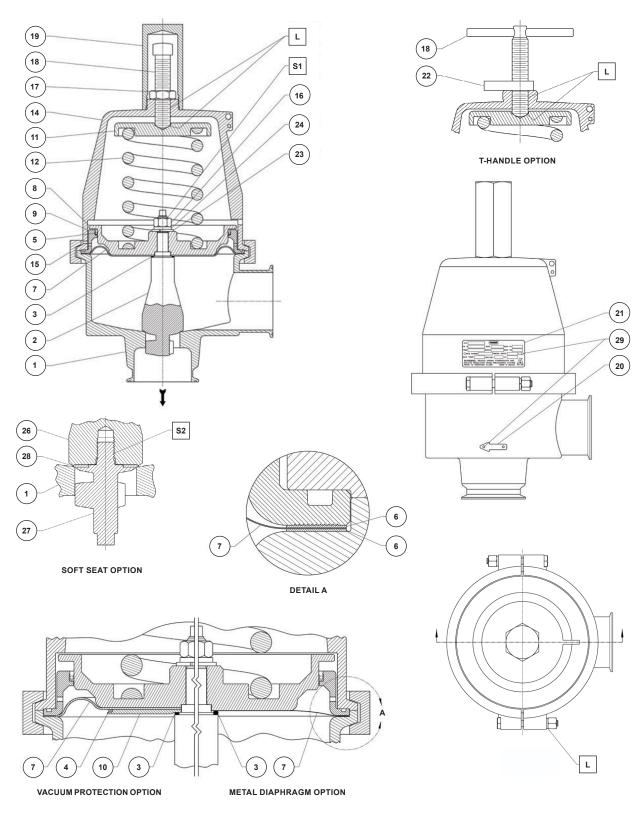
Type SR8 Backpressure Sanitary Regulator Assembly Drawing 1/2 through 1-1/2 In. / 15 through 40 mm Sizes
